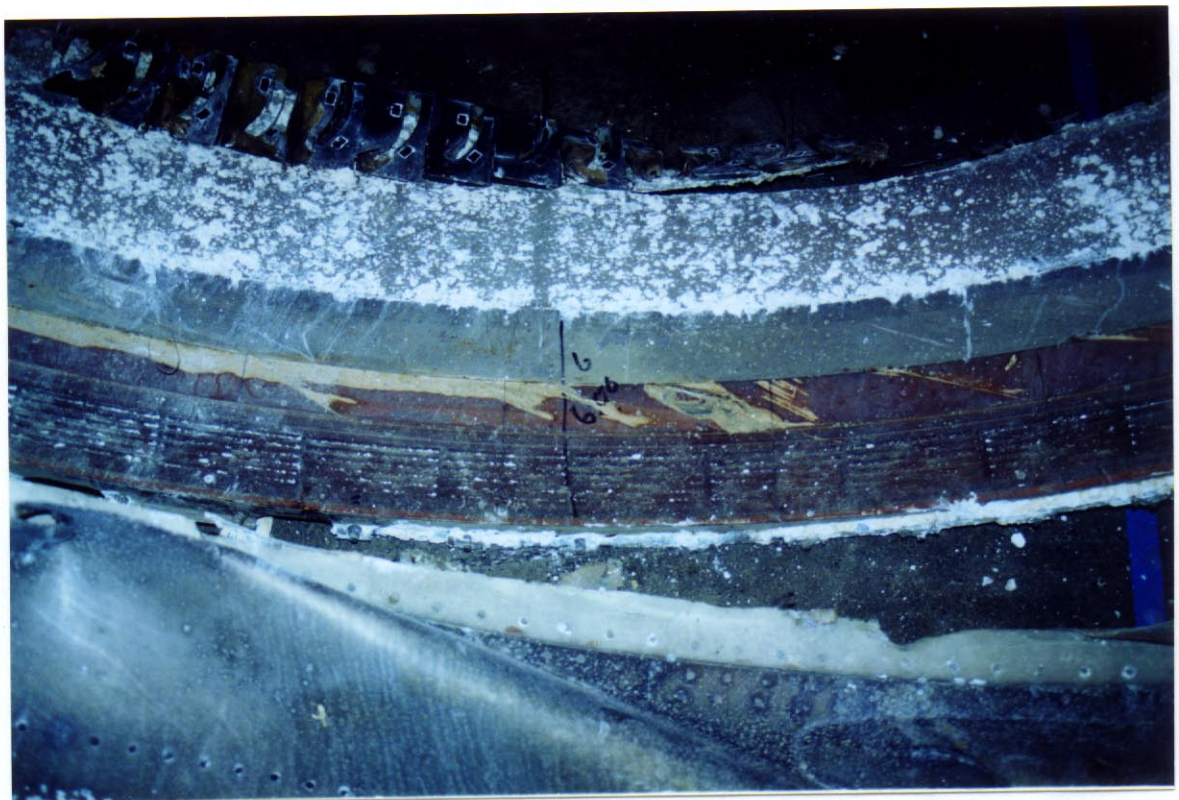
Closeup of No. 1 engine fan rubstrip showing imprints of fan blade tips.
